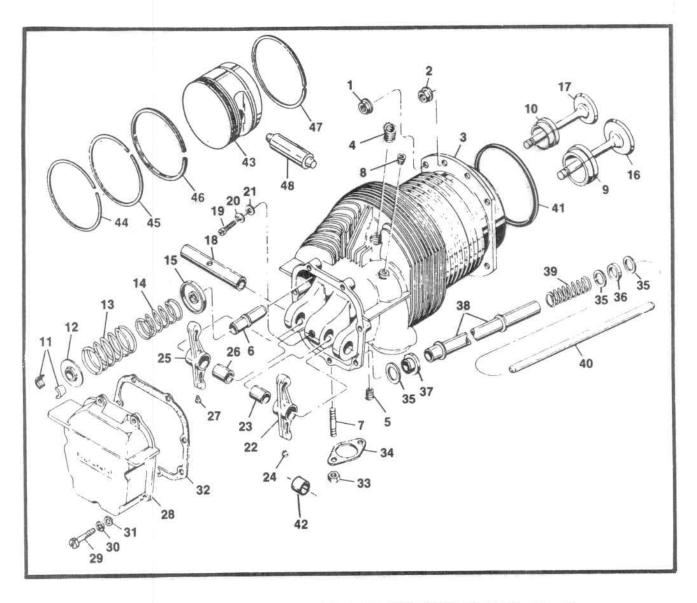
B. CYLINDER ASSEMBLY (STRAIGHT VALVE) IO-470-J,K.
